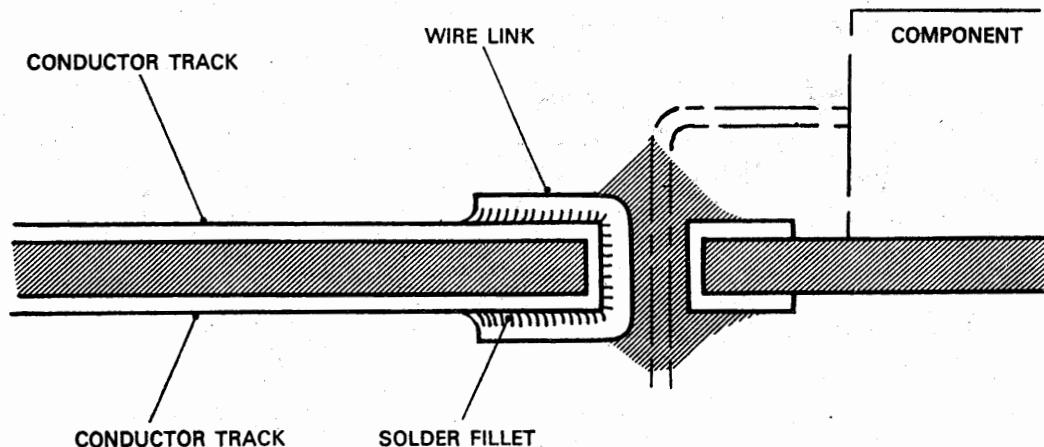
WIRE LINK REPAIR OF DEFECTIVE PLATED-THROUGH HOLE
